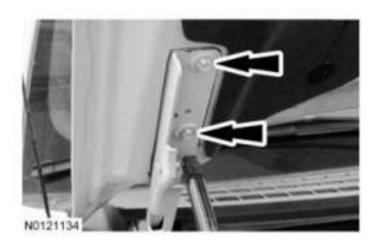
Locating Hood Mounting Bolts Courtesy of FORD MOTOR CO.
